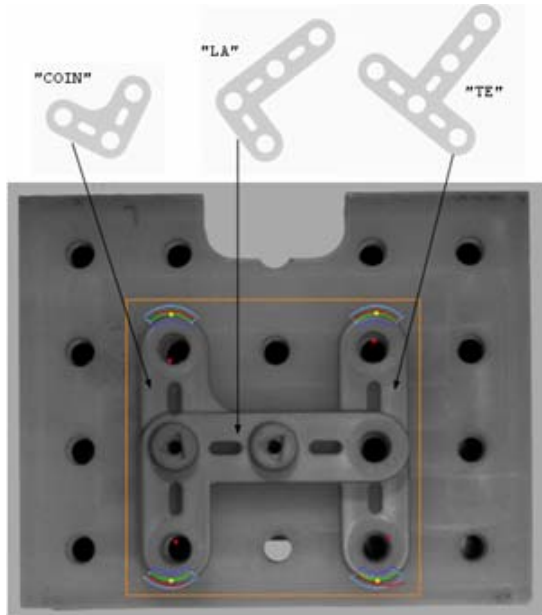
Greyscale image of the final assembly of "COIN", "LA", and "TE" components, with graphic overlay of the *vision tools* used for inspection of completeness and correct mounting.
